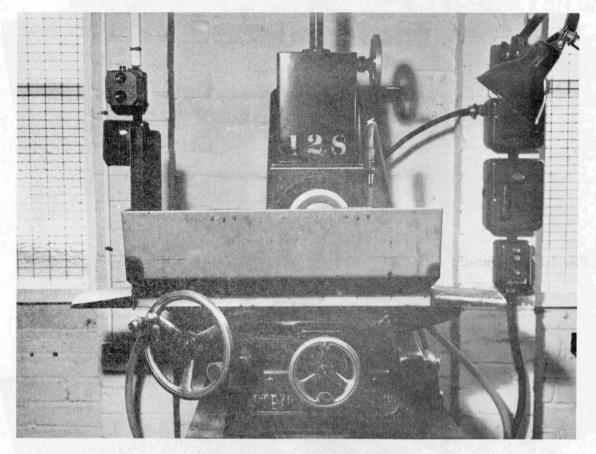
The machine, general view. N.B. The anti-splash guard shown partially covering the cutting wheel is removed in subsequent photographs.
